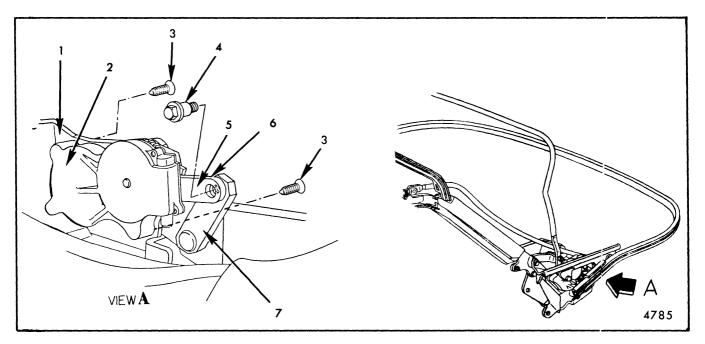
Folding Top Actuator Attachment (View in Direction of Arrow "A")
